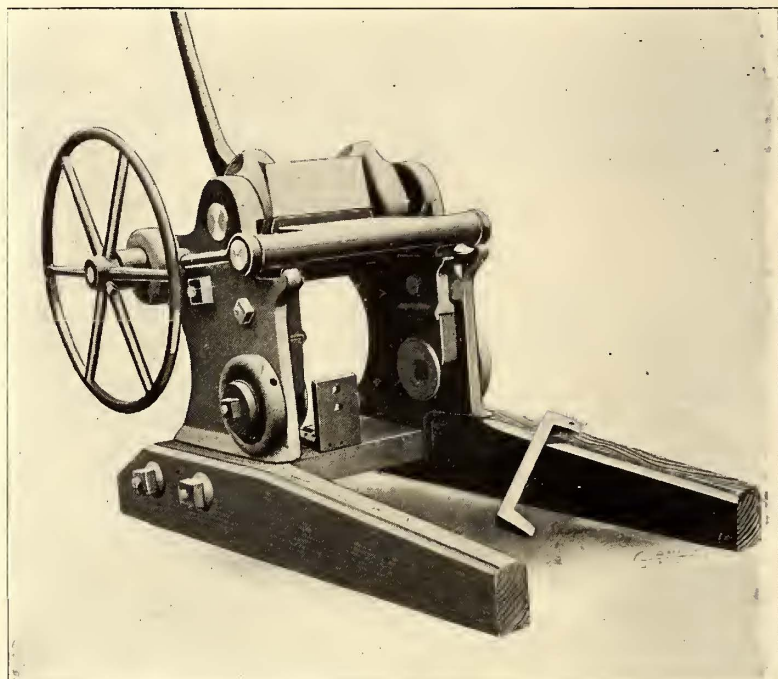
LARGE ANGLE-BENDER MACHINE, OPERATED THROUGH HAND WHEEL
